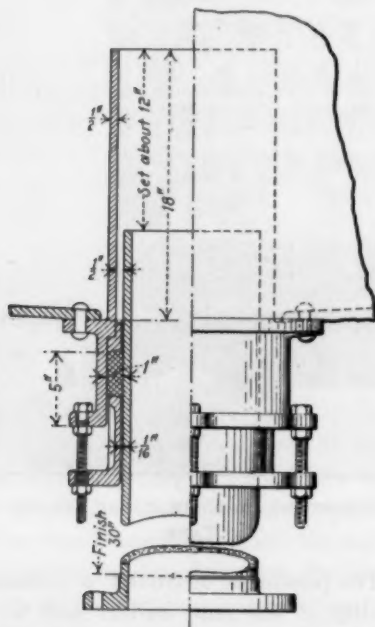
EXAMPLE OF PROPER DESIGN OF EXPANSION JOINT FOR STEEL TANK
